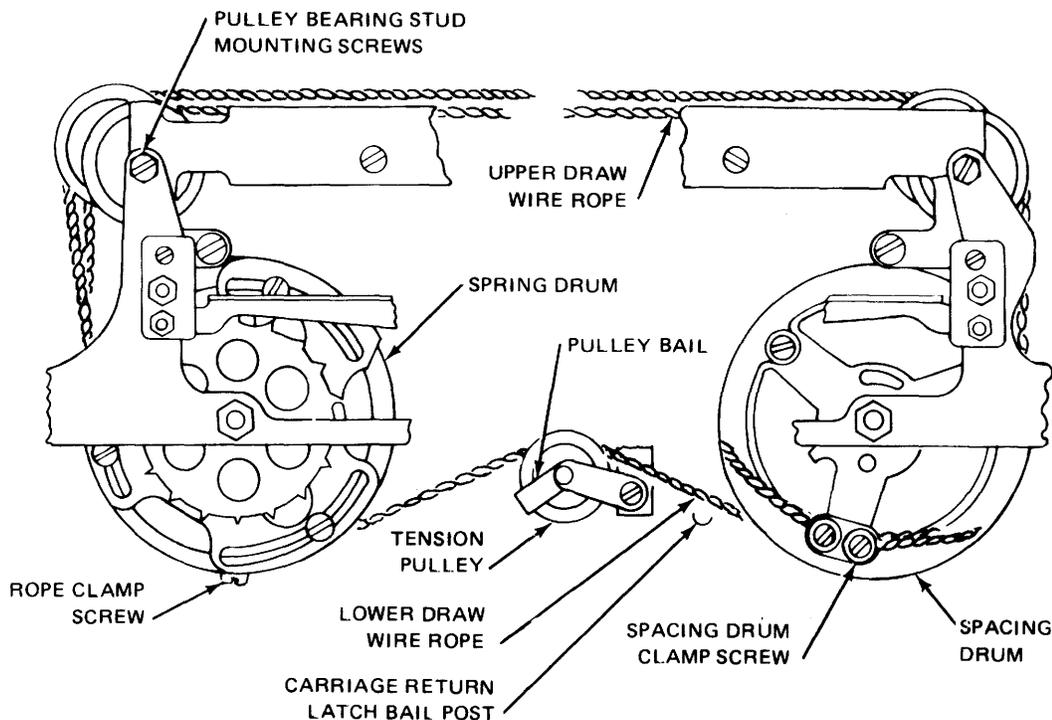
Upper Draw Wire Rope Routing (Front View).
